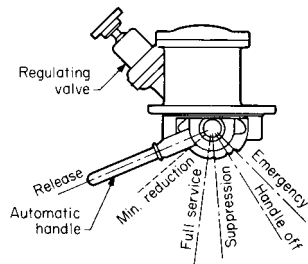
Automatic-brake valve-handle positions for 26-L brake equipment.
